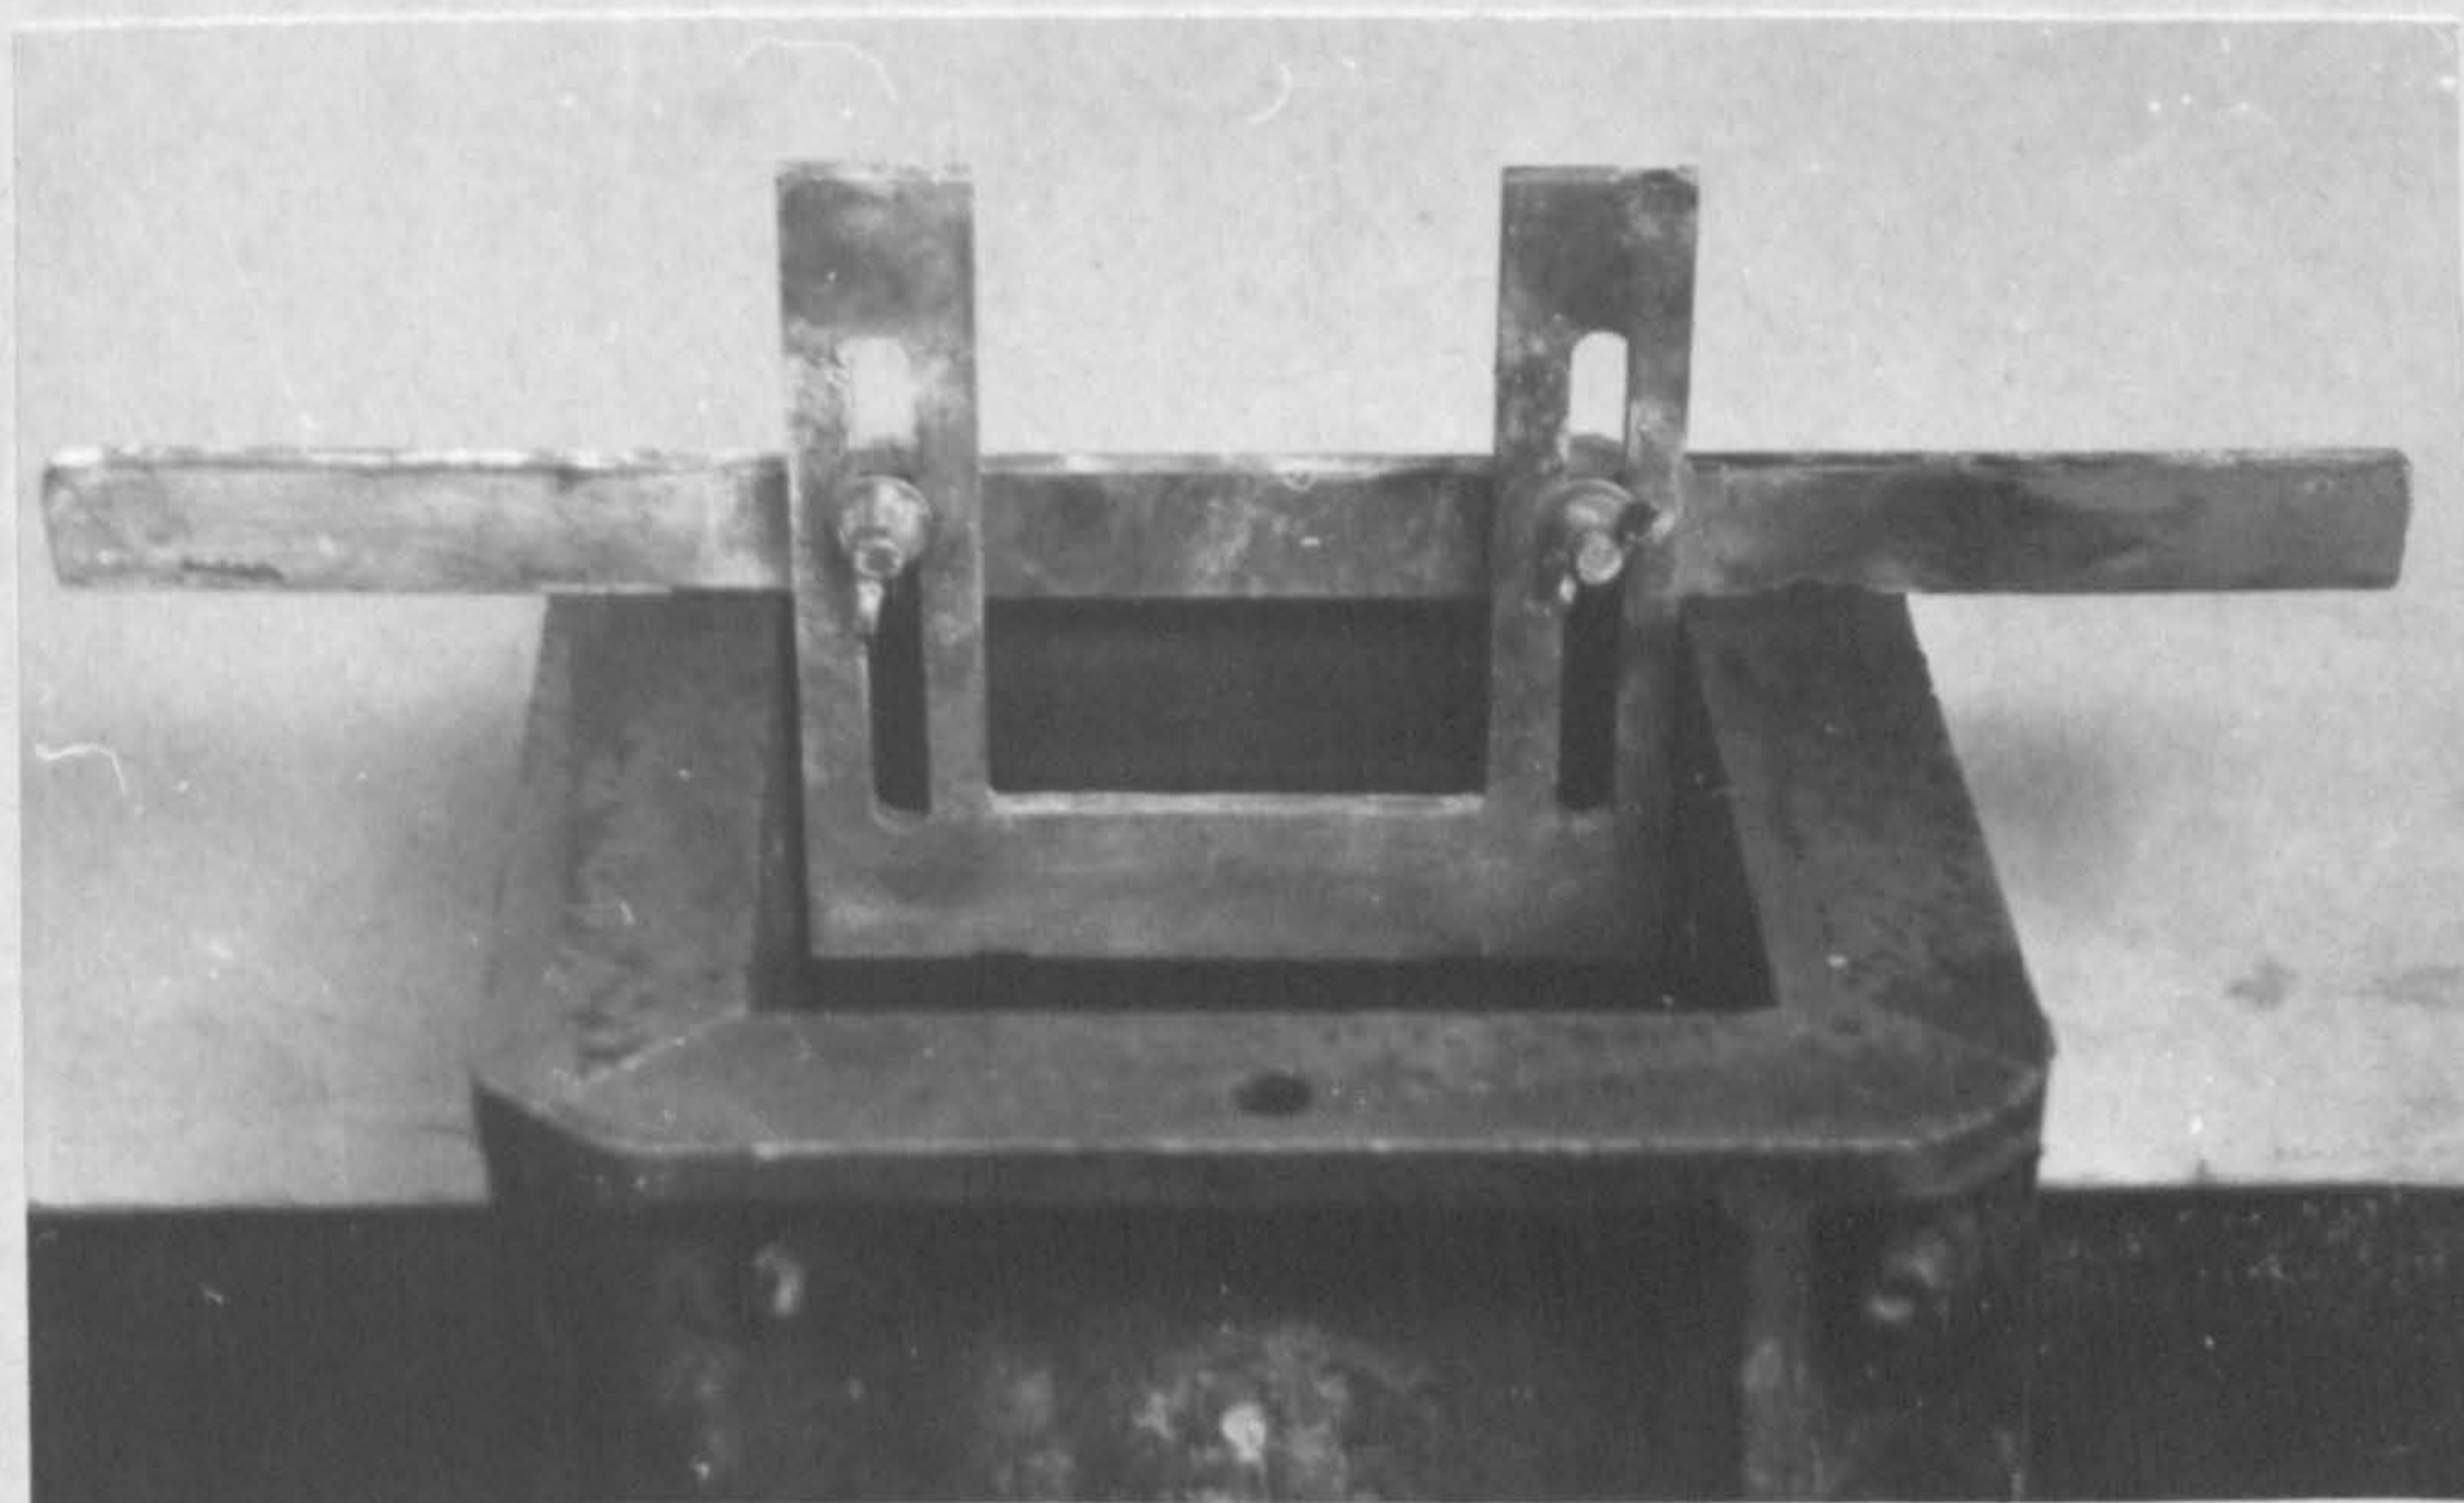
ADJUSTABLE LEVELLING BAR
